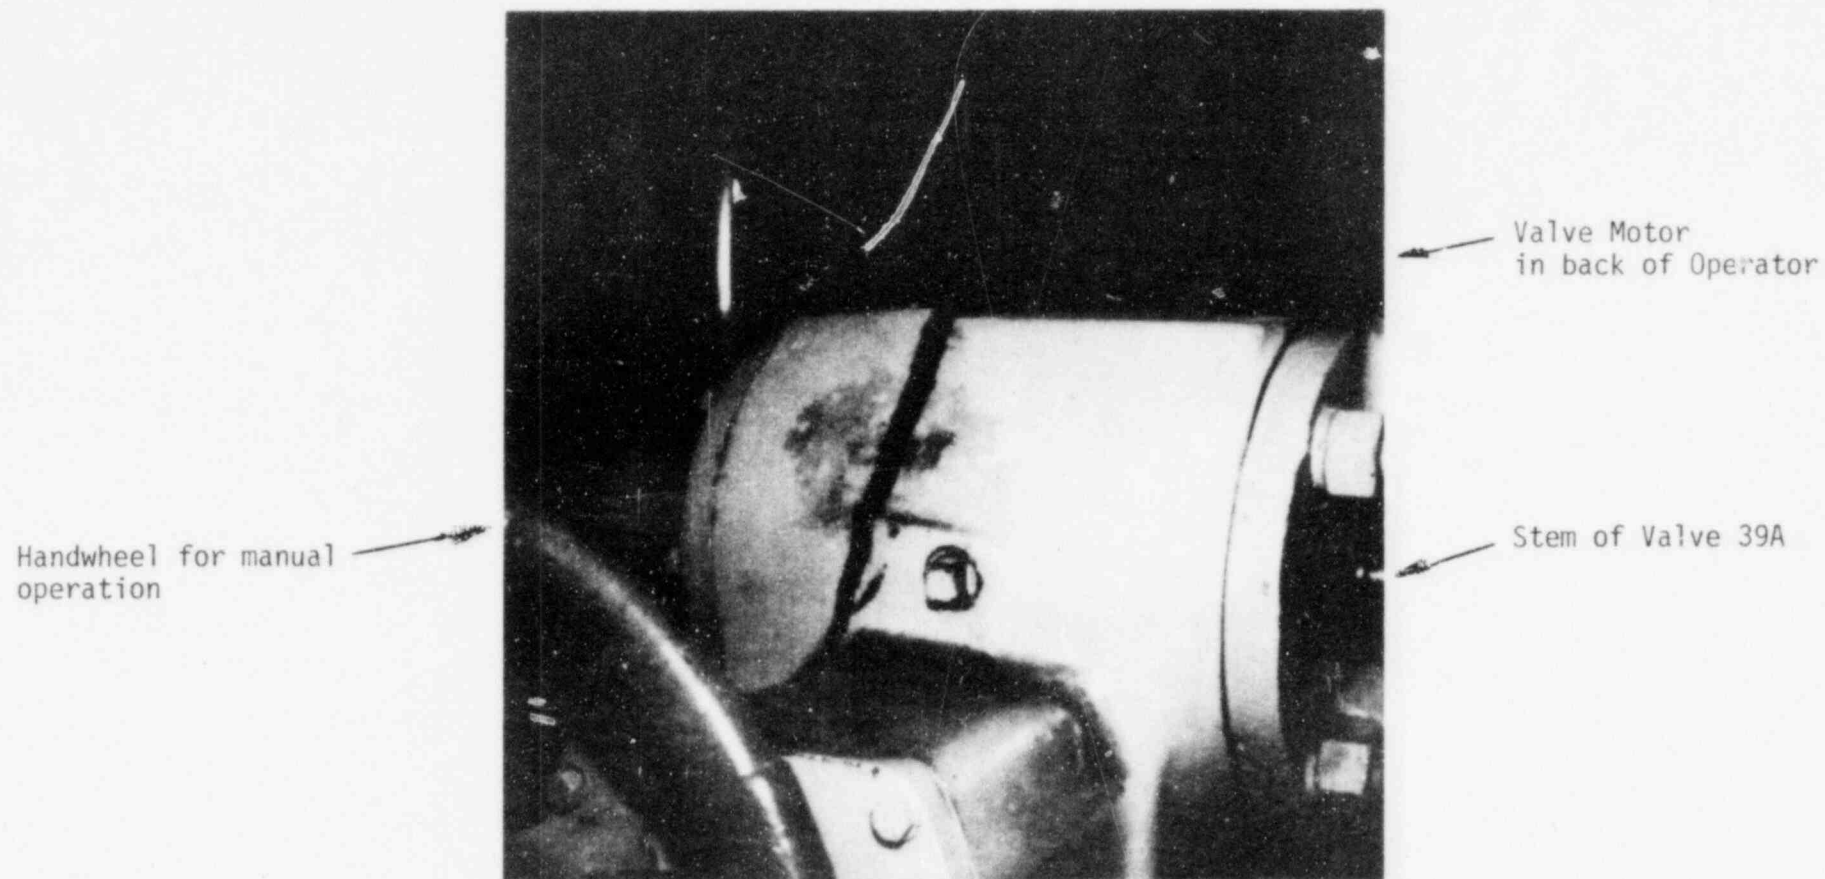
Failed SMB-0 Motor Operator For Valve 39A
